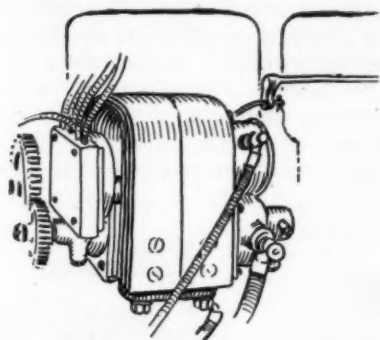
Special Holley high-tension magneto designed for small high-speed, four-cylinder motors such as the Ford.
